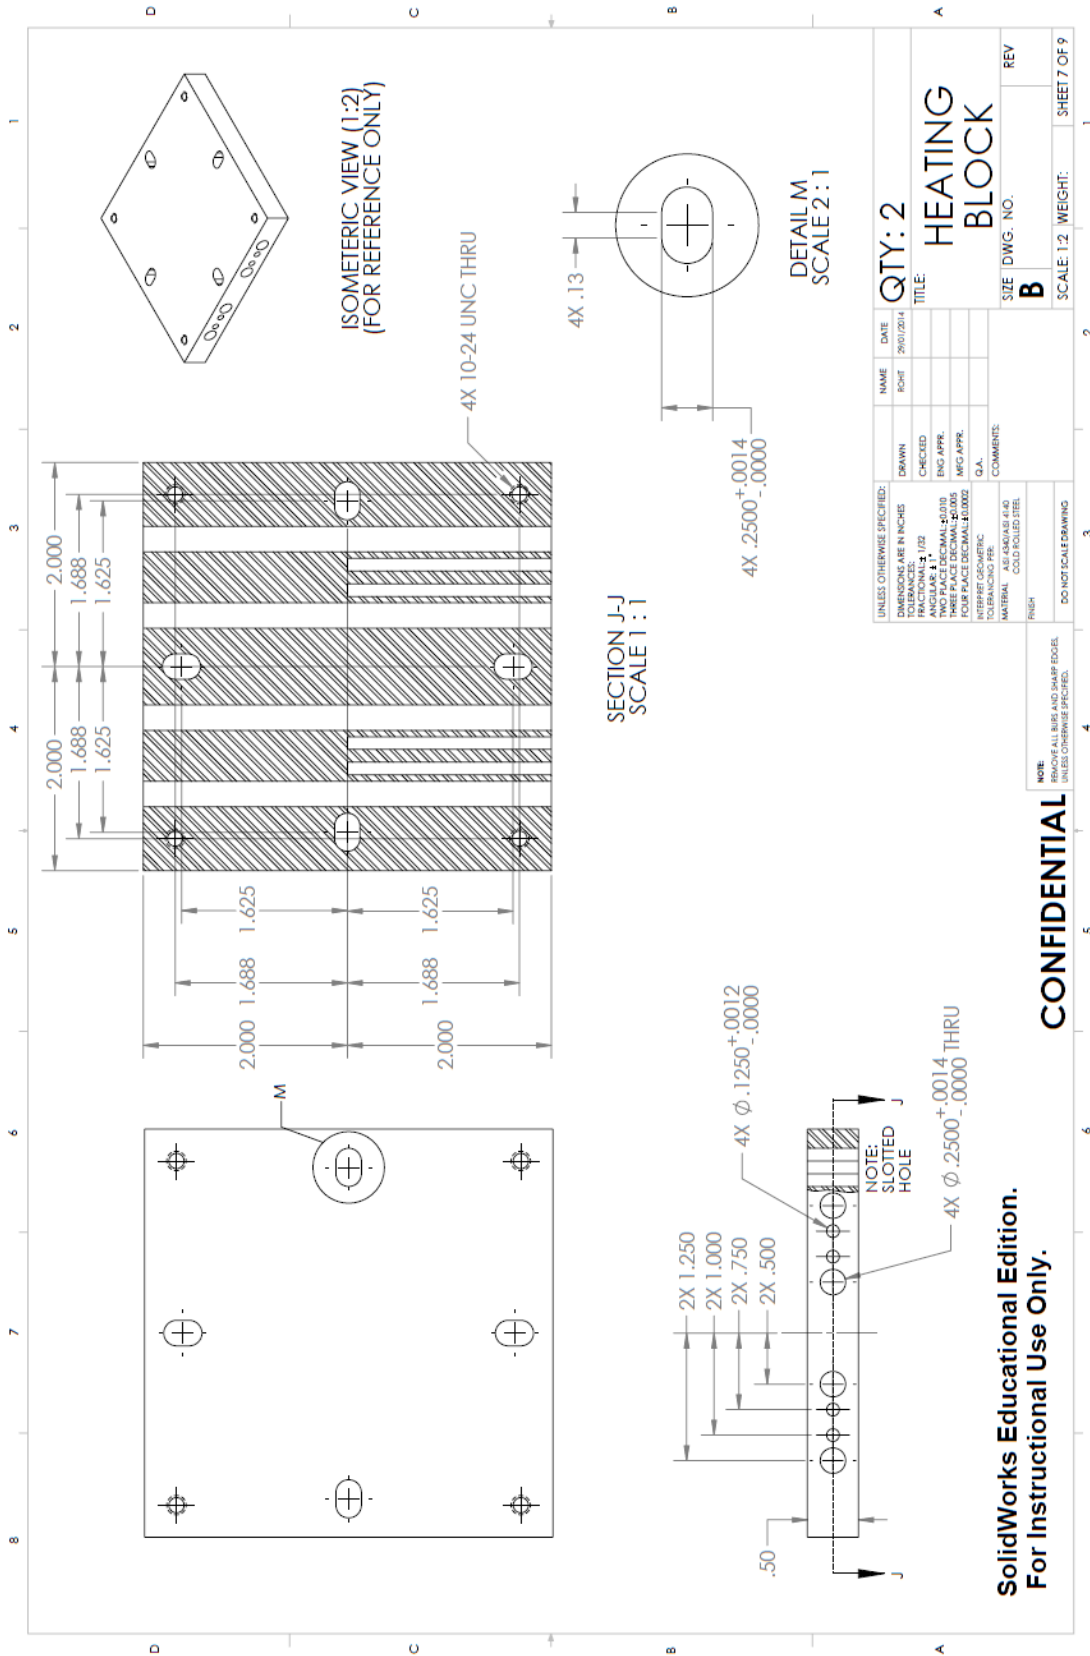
Detailed drawing of the heating block used in the benchmark study.
